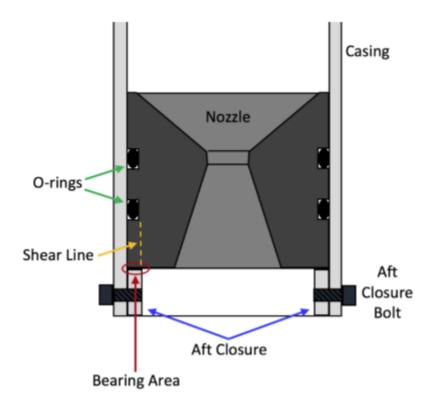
Cross-section of a submerged nozzle with a bolted aft closure, showing the bearing area and shear line.
